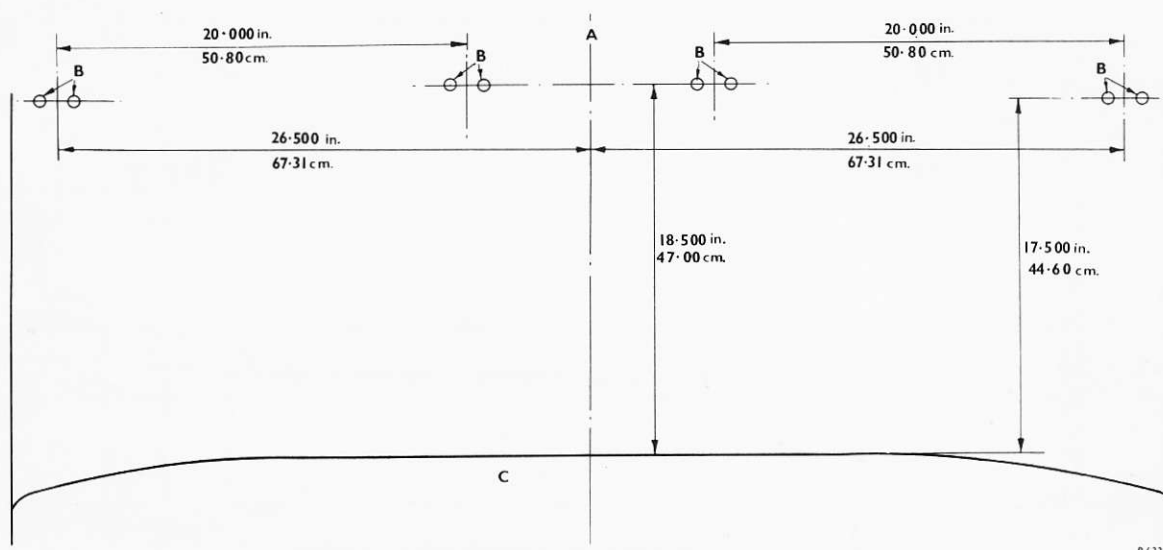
Dimensions for drilling holes for front seat shackles — Long Wheelbase cars with division
